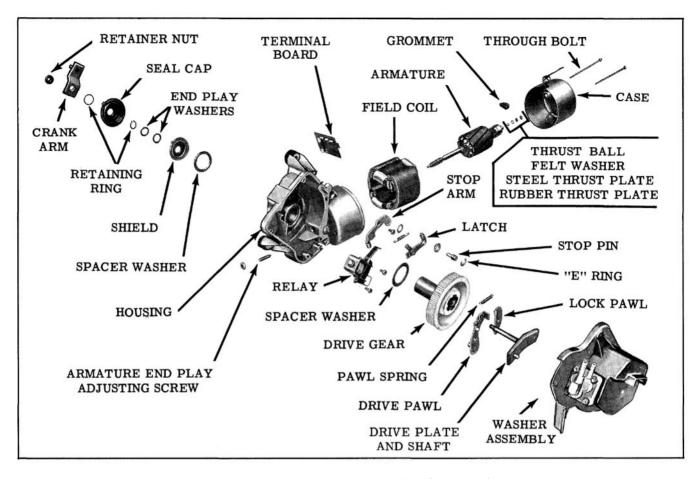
Wiper and Washer Assembly (Two-Speed)
